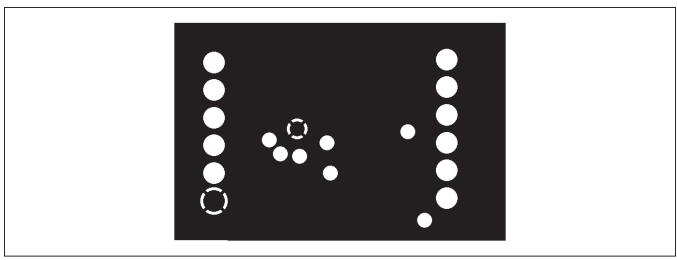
MAX5487PMB1 Peripheral Module PCB Layout—Inner Layer 2 (Power)
